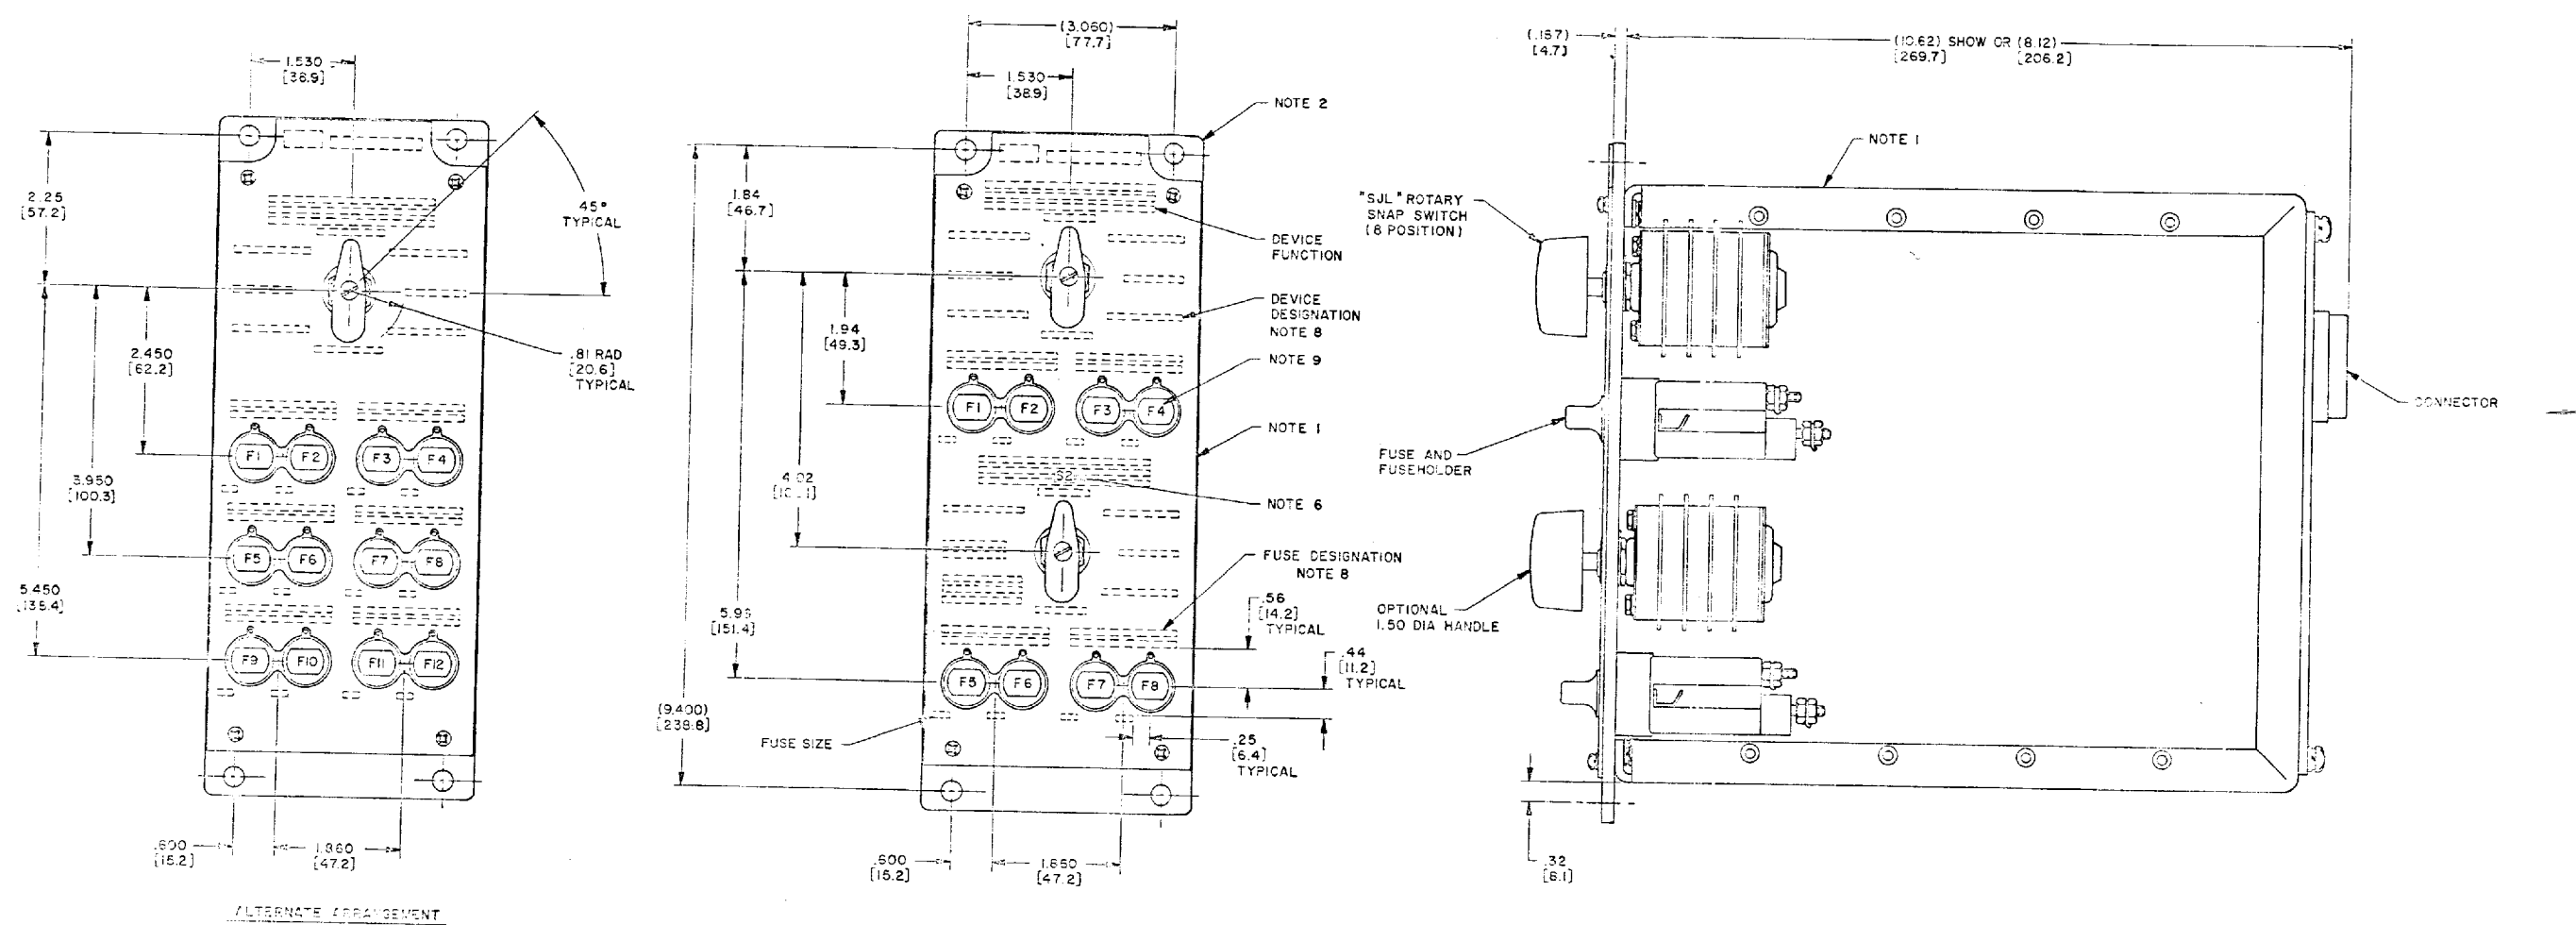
Switch and fuse panel assembly (sheet 4).
